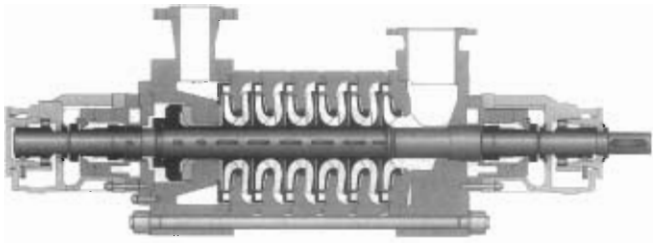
A high pressure segmental pump with balance disc and roller bearings
